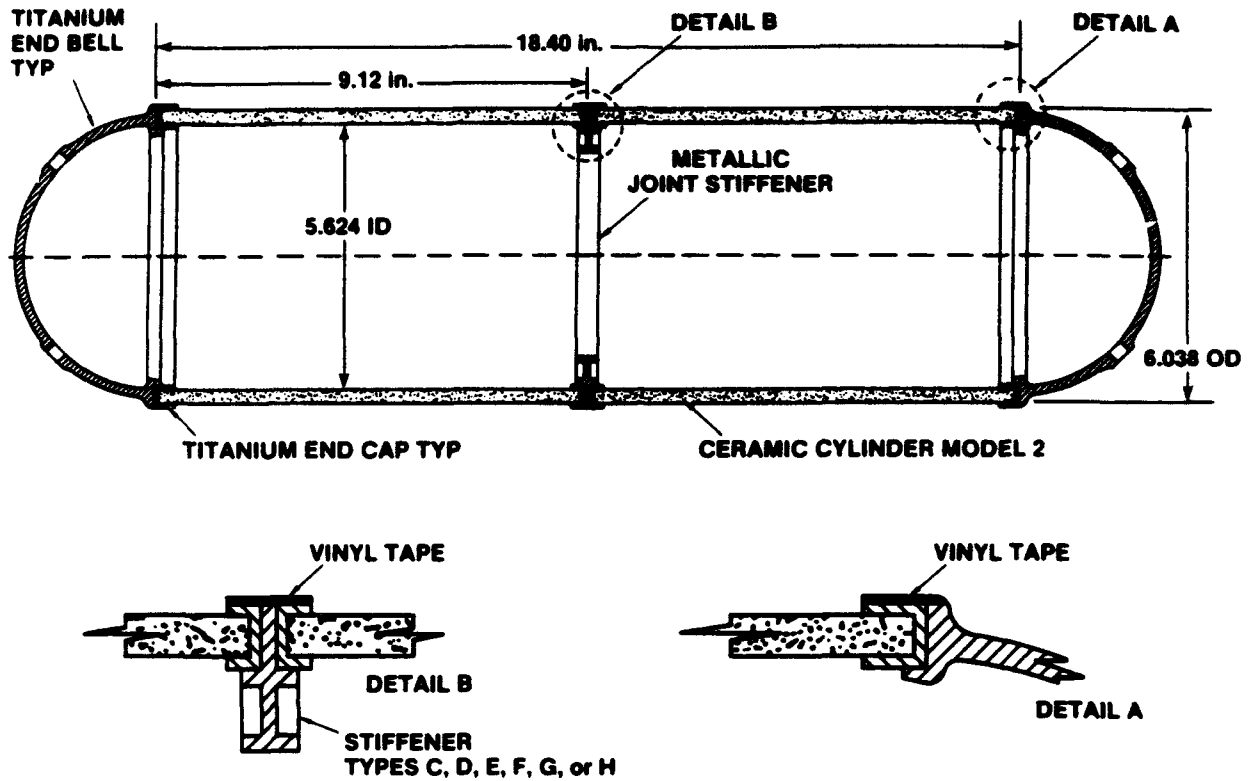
Joint stiffened ceramic housing assembly; Type Y; 2 cylinder sections Mod 2.
